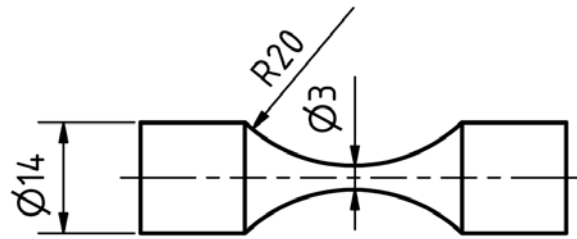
Specimen Shape for 20 Hz tests.
